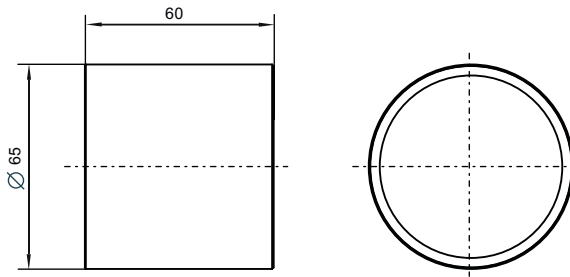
Dimension drawing: Protective lens cover \varnothing 65 mm; metal/glass
